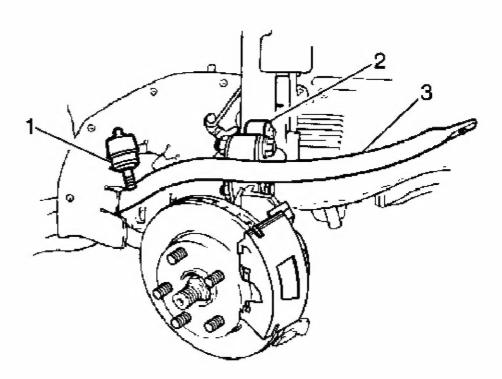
Guiding Stabilizer Shaft In/Out Left Side Of Vehicle Courtesy of GENERAL MOTORS CORP.
